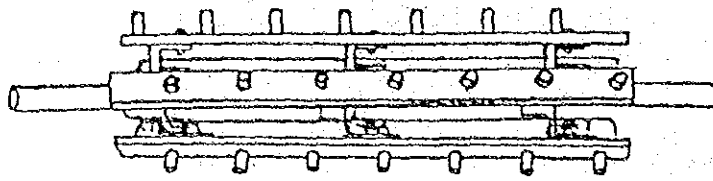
Rectangular Spike Tooth Cylinder (Drum Type)
